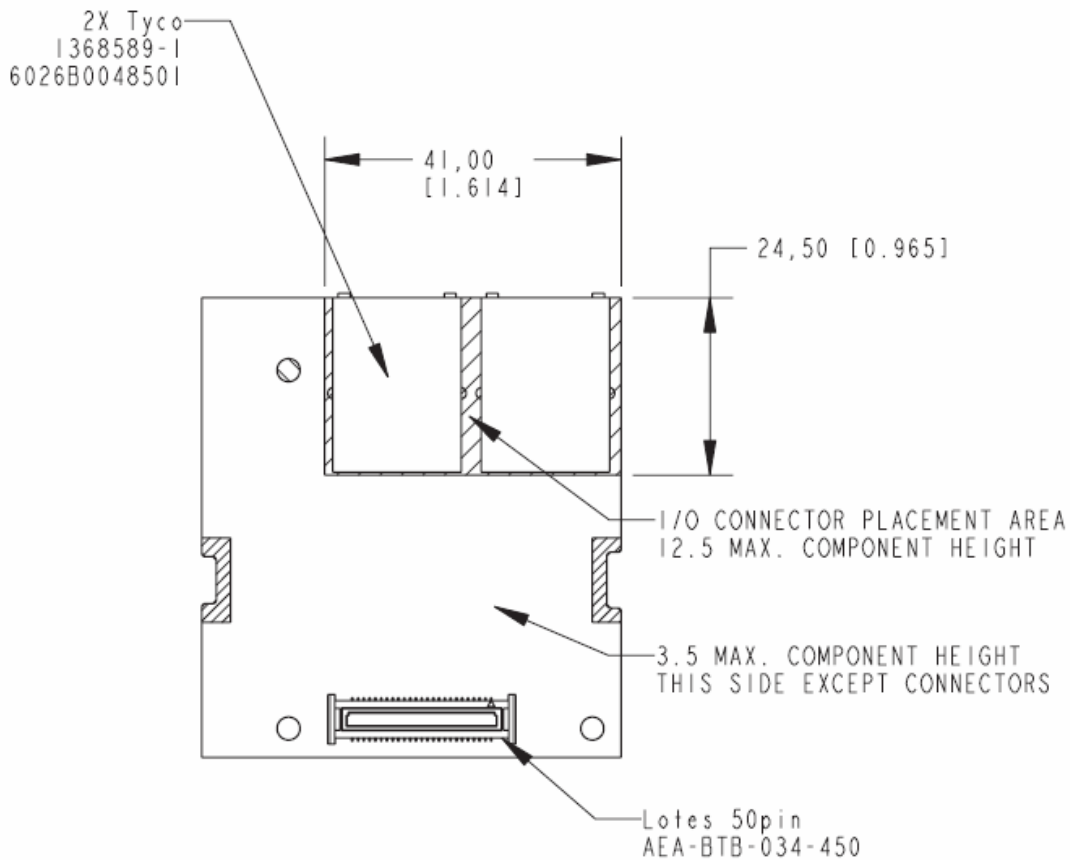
Dual Gigabit Ethernet I/O Module Dimensions; Bottom View
